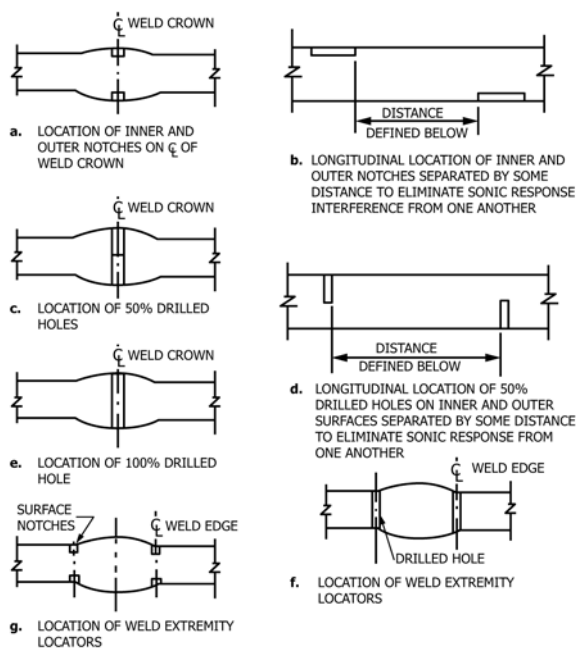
Typical Notch Locations for Fusion Welded Pipe
